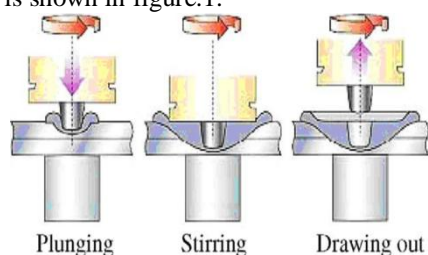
Schematic of Friction Stir Spot Welding process
